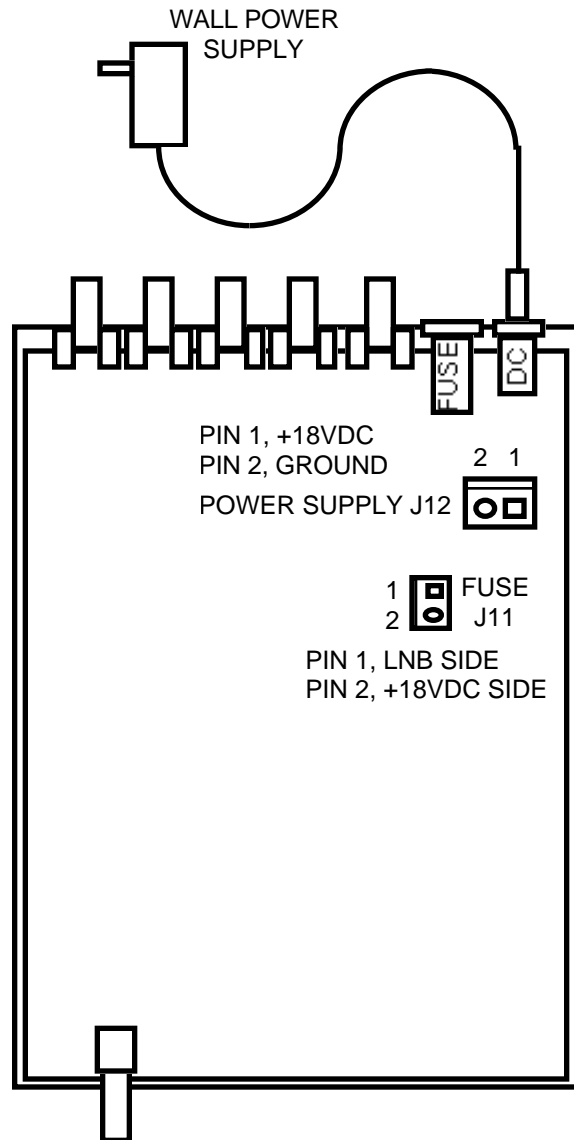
284-15 MECHANICAL ASSEMBLY
